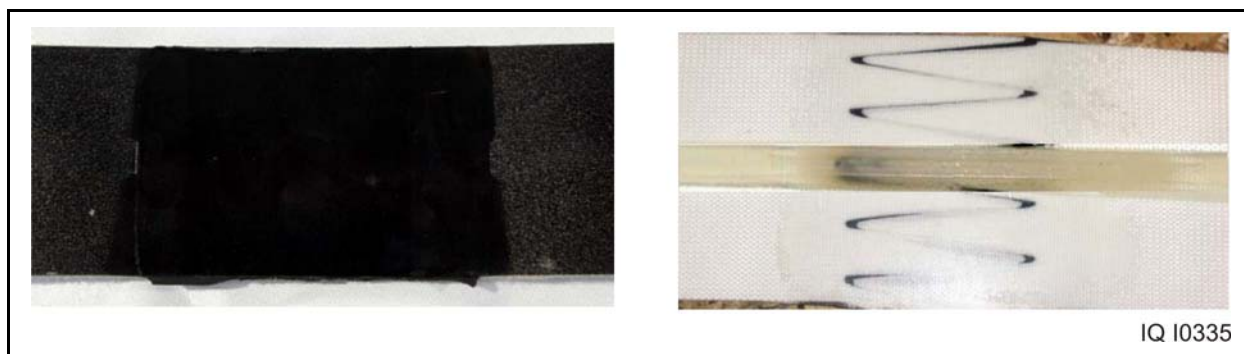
24 Top and Bottom Views of Welded Belt Splice
